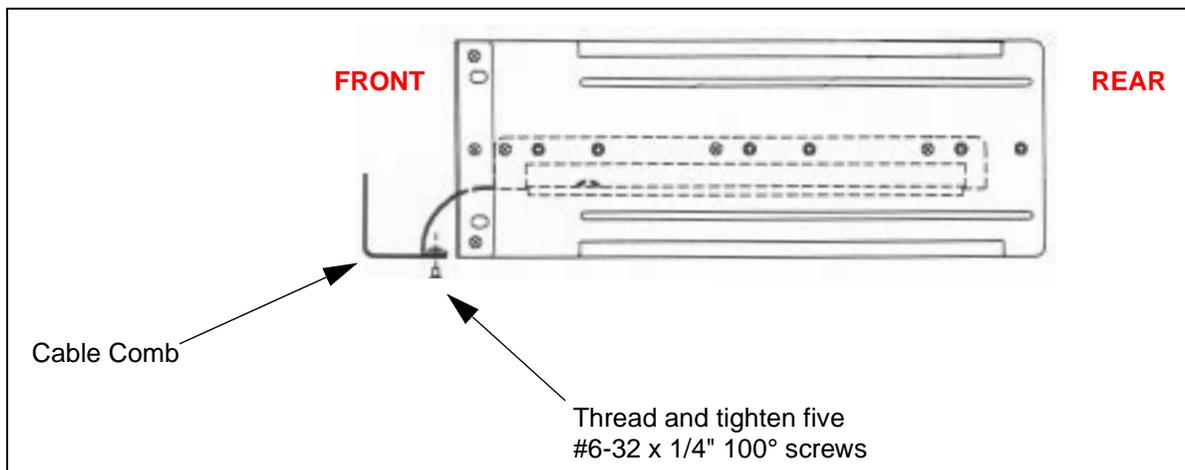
Connecting the Cable Comb to the Tray Assembly
